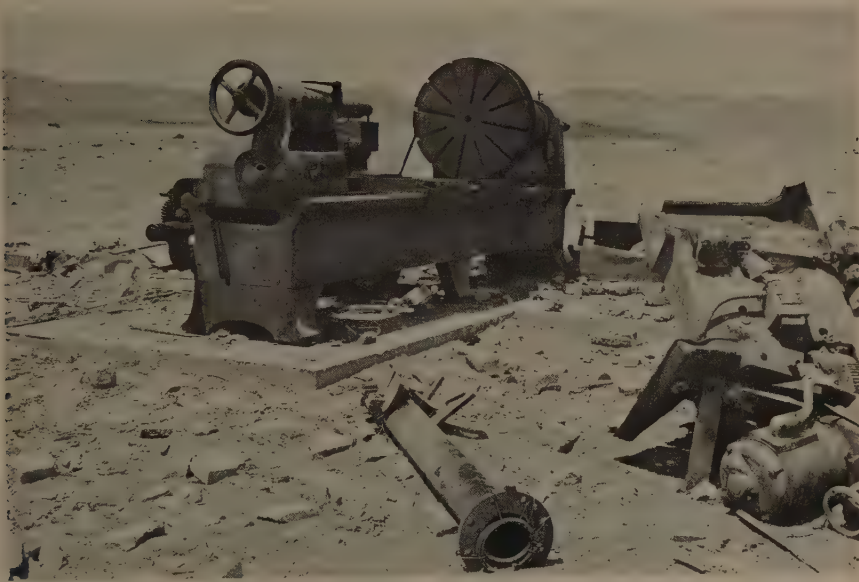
Heavy-duty lathe after a nuclear explosion (10 psi overpressure).
